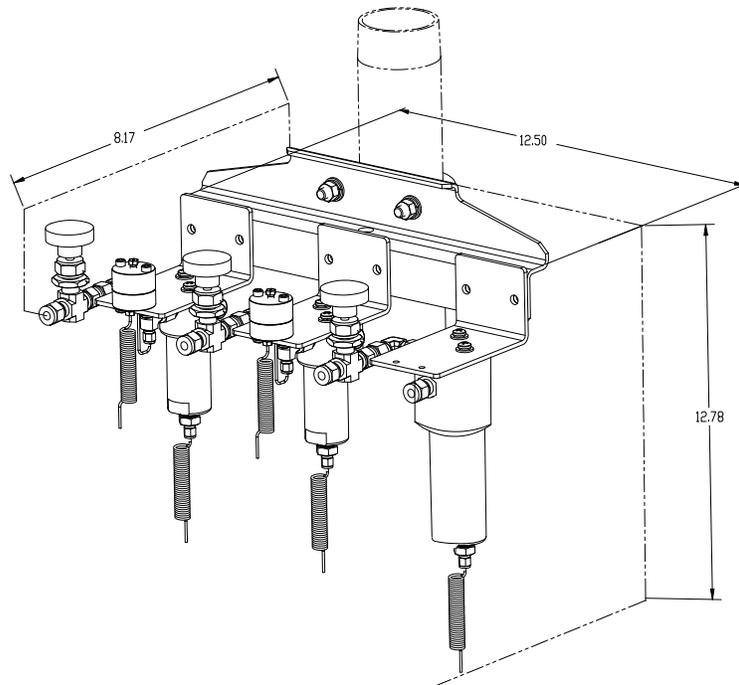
Single Stream Sample Conditioning Assembly
